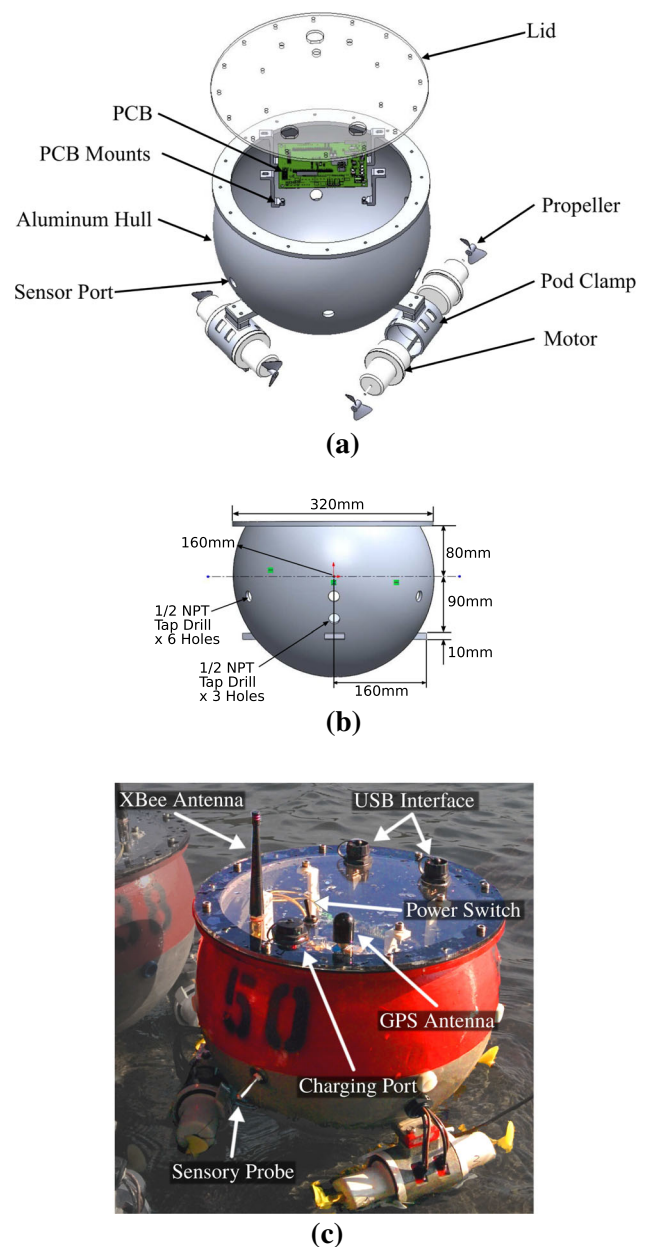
Body of the buoy. a Semi-exploded rendered view of the CAD design. b Side-view with main dimensions. c Fully assembled BoB unit #50 in the field, ready to be deployed
